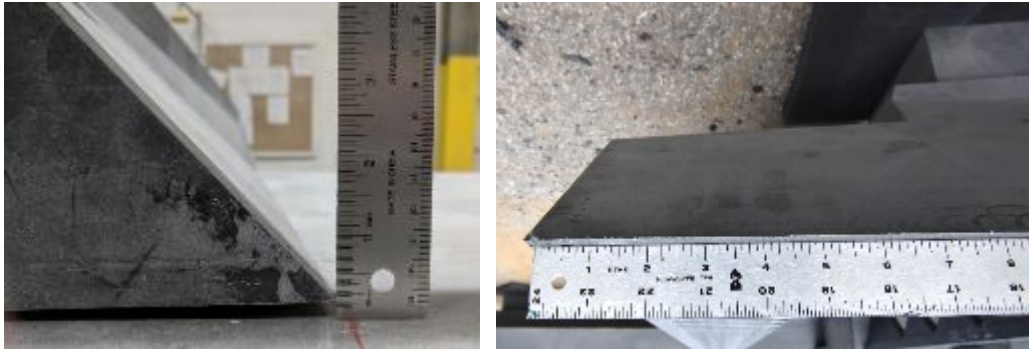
Left: corners of the north molds warped because of high residual stresses that were generated by the long layer times needed to print the support and extra material for the horizontal surfaces. Right: additional material was printed at the bottom of the mold to offset warping at the corners when the bottom of the mold was machined.
